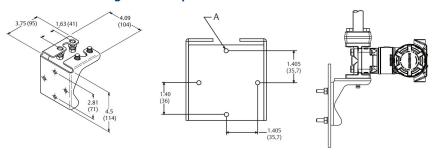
Mounting bracket option codes B1, B7, and BA
